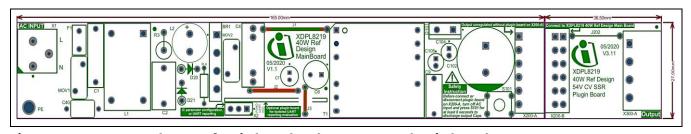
PCB top layout of main board and 54 V CV SSR plug-in board
